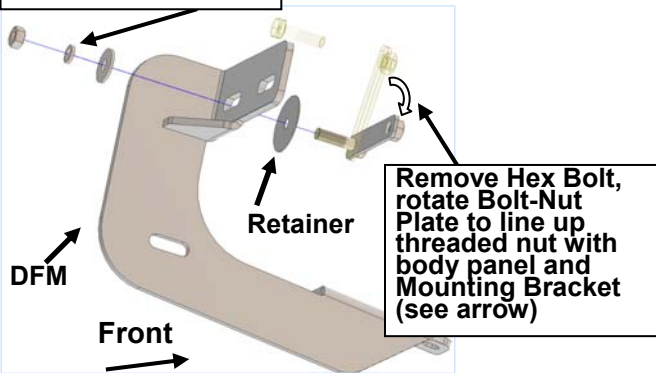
Thread Plastic Retainer onto Bolt Plate to Hold Bole Plate in Position
